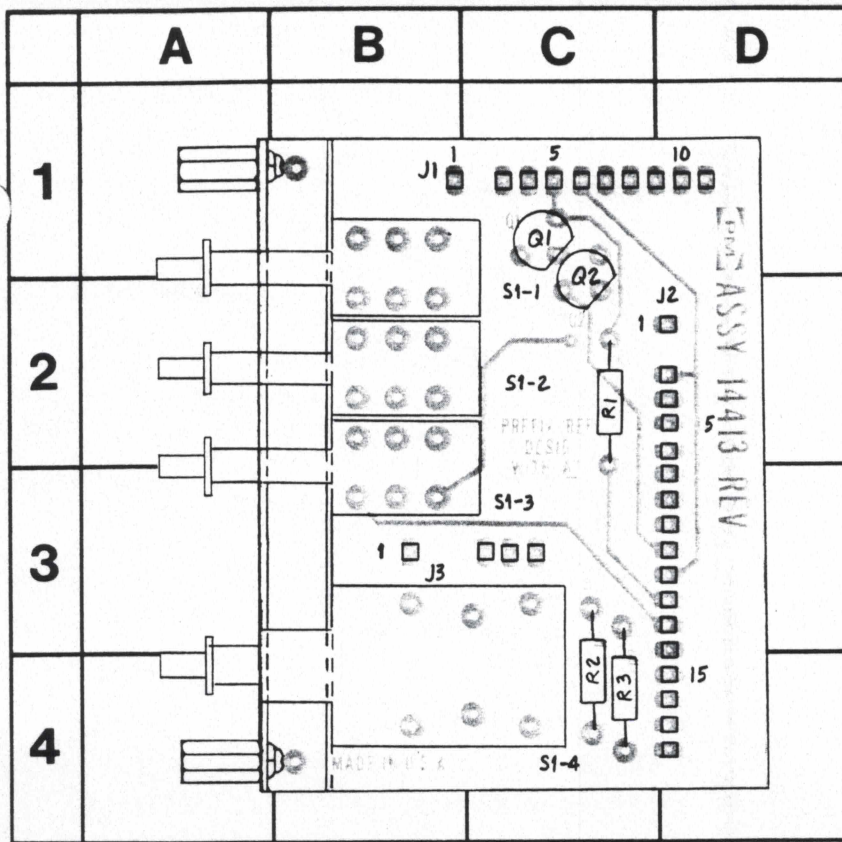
FRONT PANEL PCB ASSEMBLY
